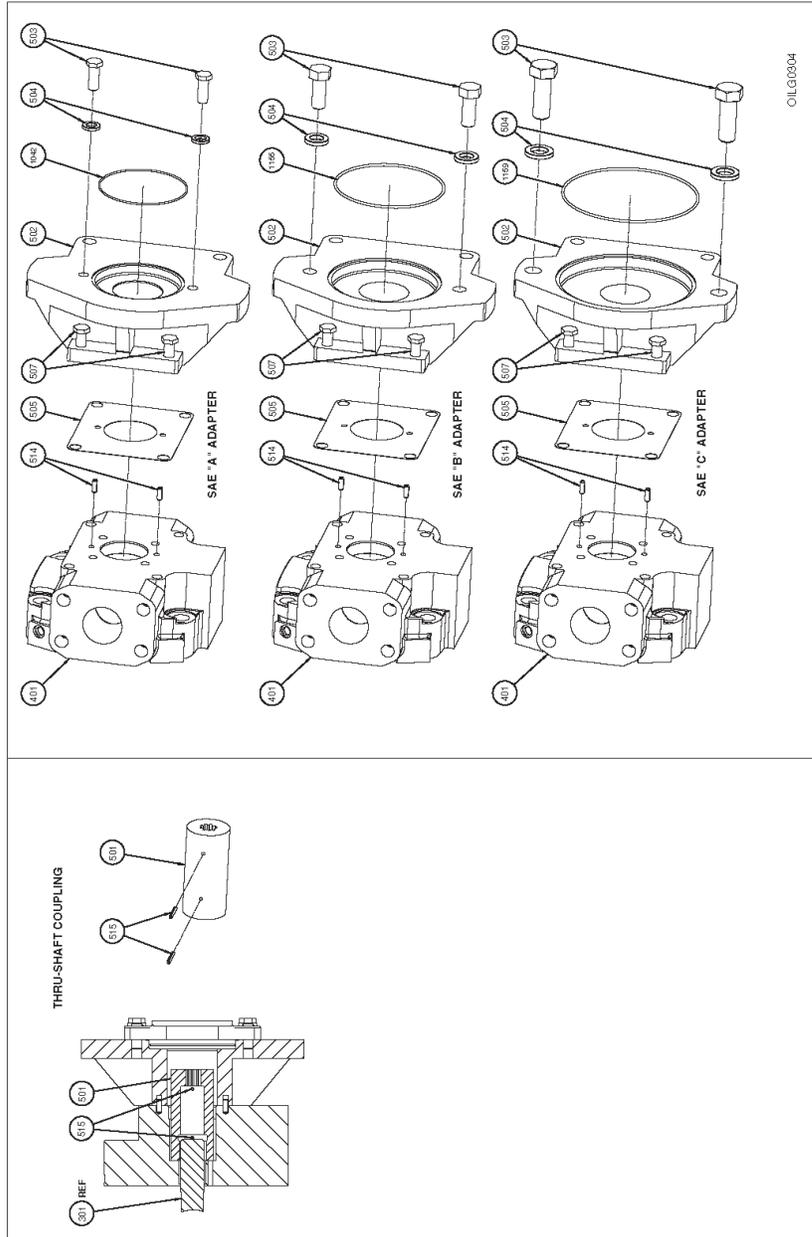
Exploded parts drawing, PVWJ-064/-076/-098/-130 C-Frame, Thru-Shaft Coupling, SAE "A", SAE "B" and SAE "C" Adapter (520024-301 sheet 3 of 4).
